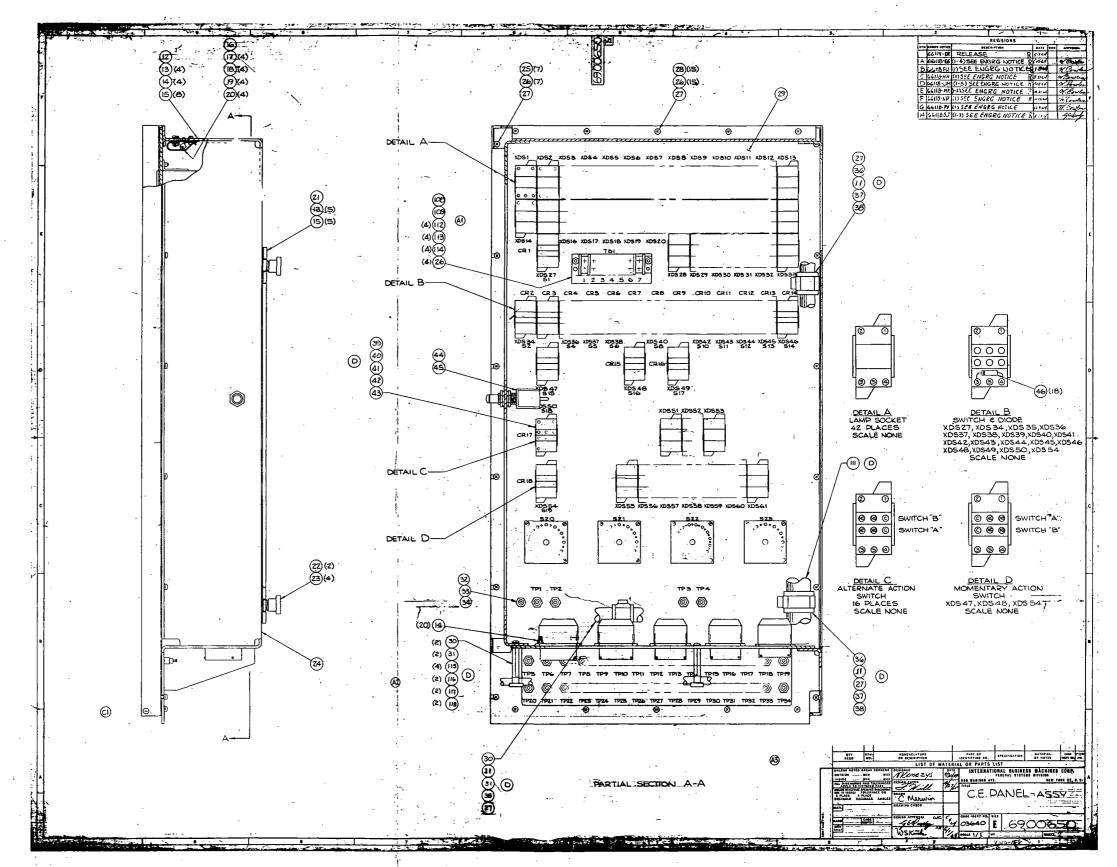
C. E. Panel Assembly (03A4) Assembly Drawing(Sheet 2)
